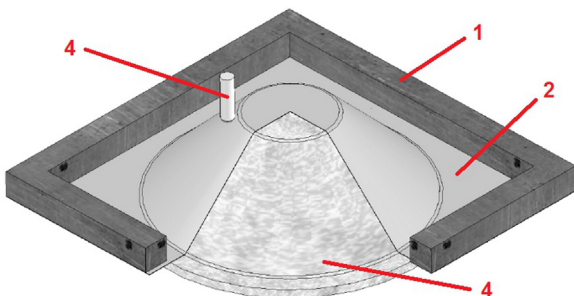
Illustration of TPIF in cross sectional view, with 1: clamping frame, 2: sheet, 3: full die, 4: forming tool.
